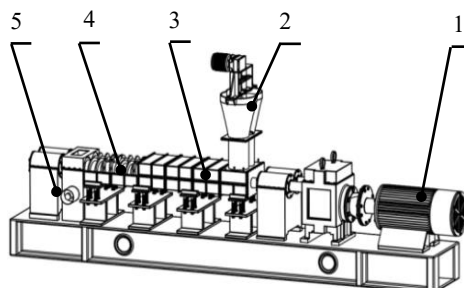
Three-dimensional model of the twin-screw pulping machine of rice straw
